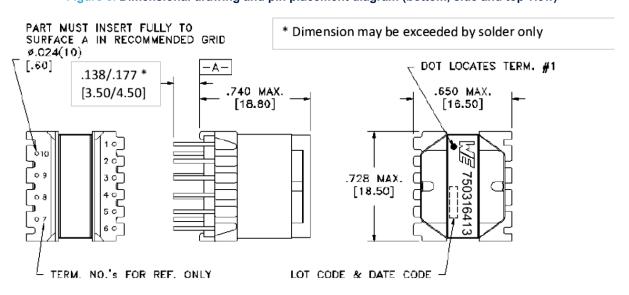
Dimensional drawing and pin placement diagram (bottom, side and top view)
